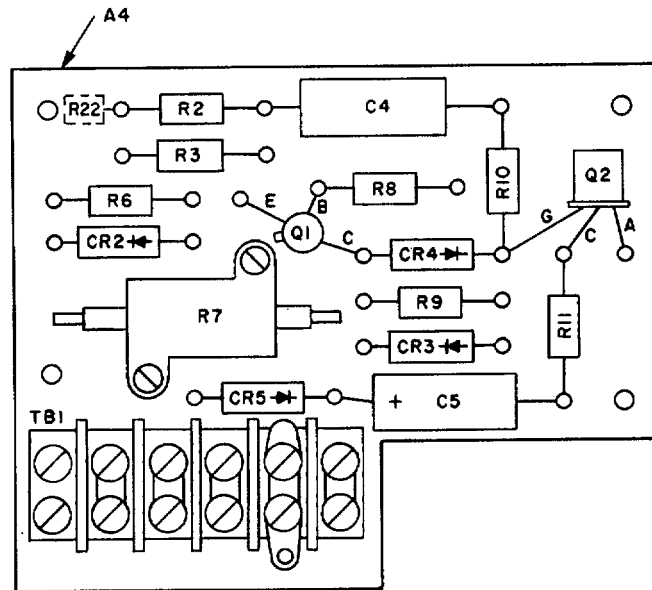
Hv power supply 3A9A1, top view, parts location.
